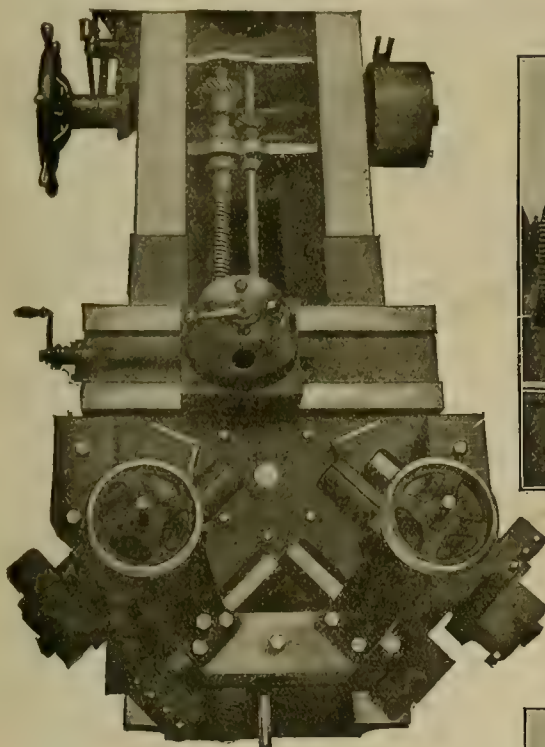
Top View of Turret and Bed of 24-Inch Lathe.
